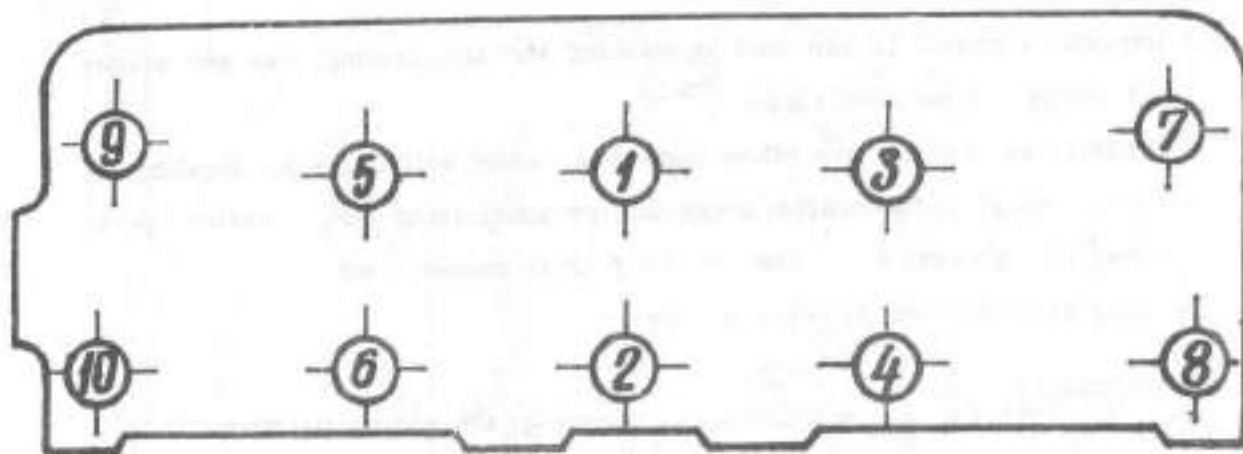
CYLINDER HEAD BOLTS FASTENING ORDER.
